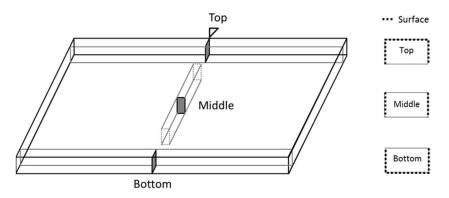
Illustration of the fracture planes on foamed test pieces.
